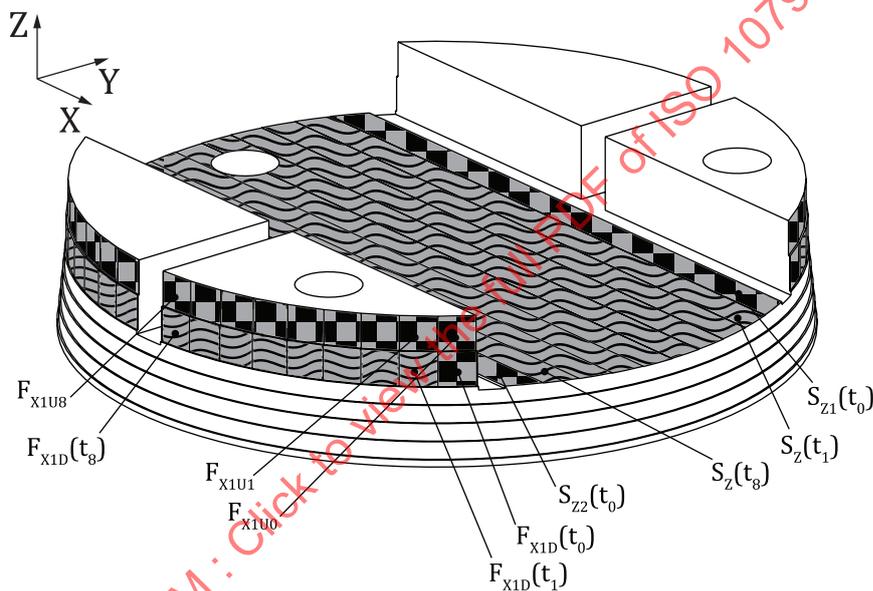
Finished test piece geometry with highlighted reference (checkerboard) and measurement surfaces (waves)
